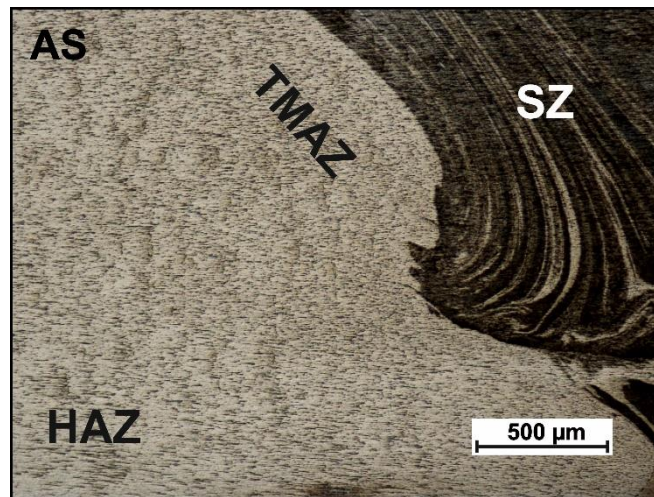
The cross-sectioned surface of FS welded specimen (E1)
